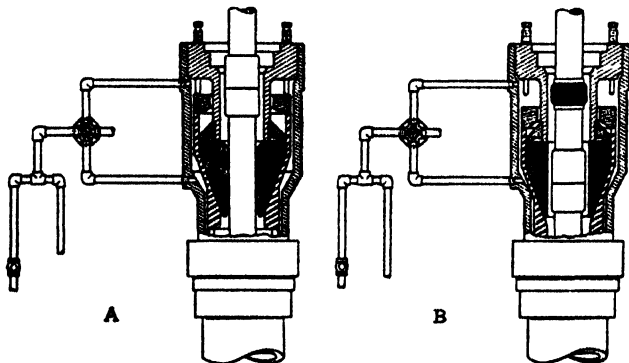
Automatic blow-out preventer showing piston raised by pressure and packing unit compressed around drill pipe. (b) Piston lowered, with packing unit in normal position showing how tool joints, casing protectors, casing couplings, &c., pass freely through the bore.
